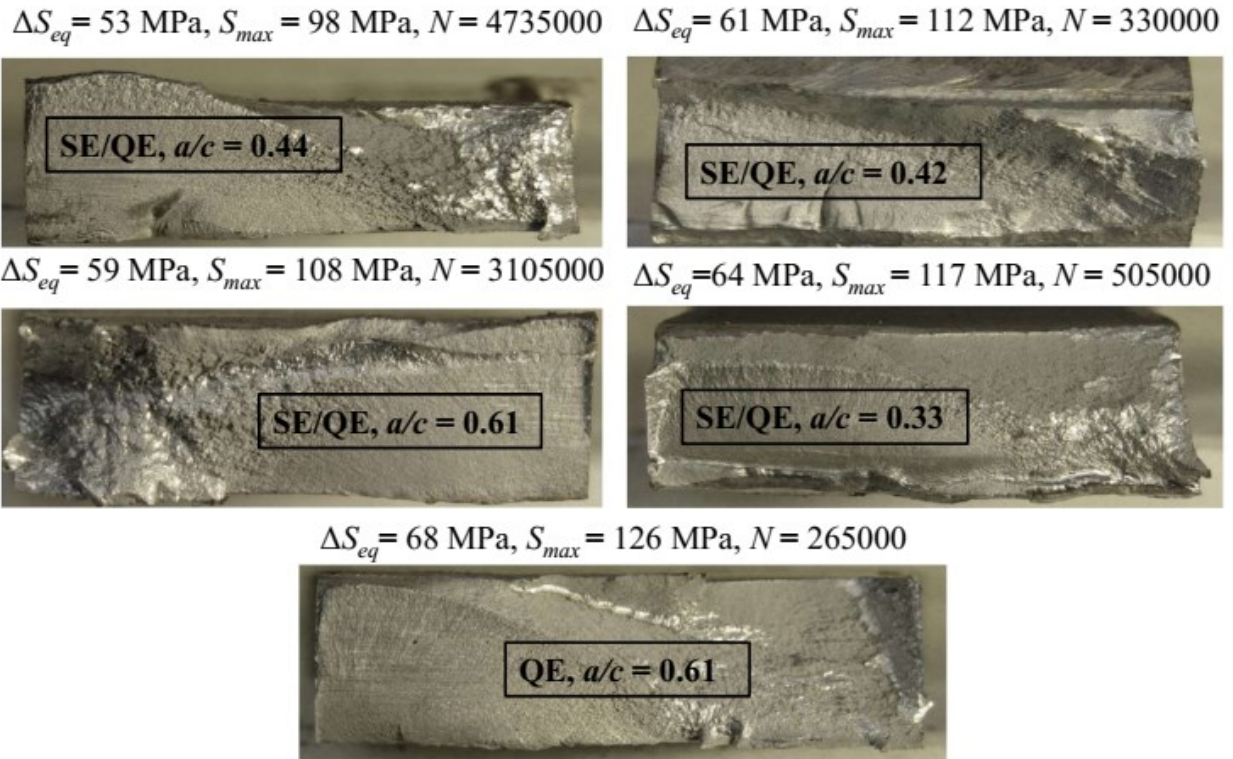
Fracture surfaces for HFMI treated aluminum specimens under CA-UL loading
